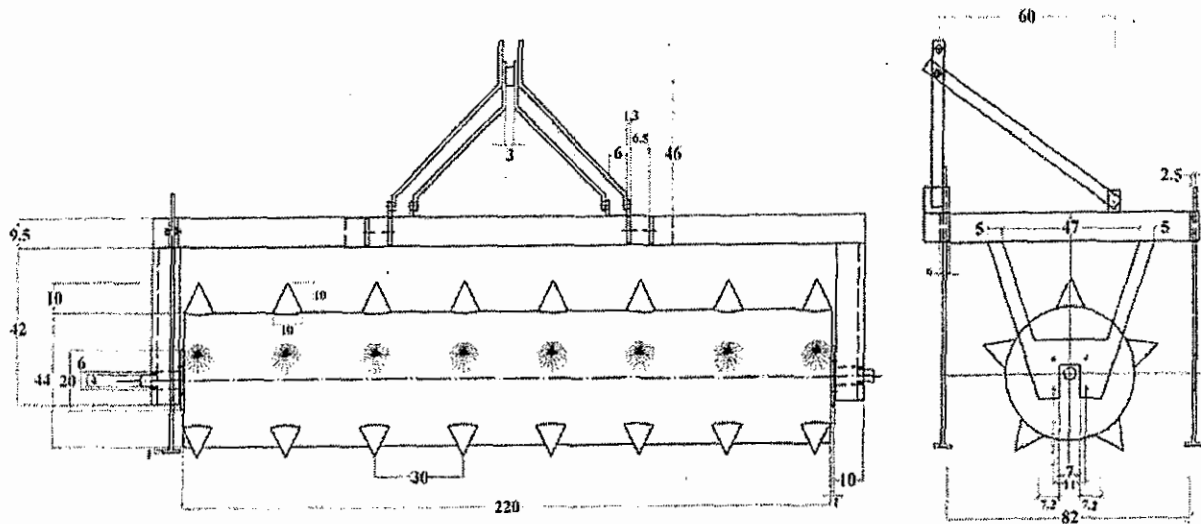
An elevation and side views of the developed machine for making holes in soil (Dimensions in cm.).
